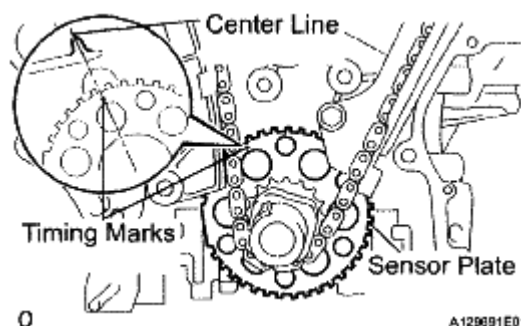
Identifying Timing Mark On Crank Angle Sensor Plate To RH Block Bore Center Line
